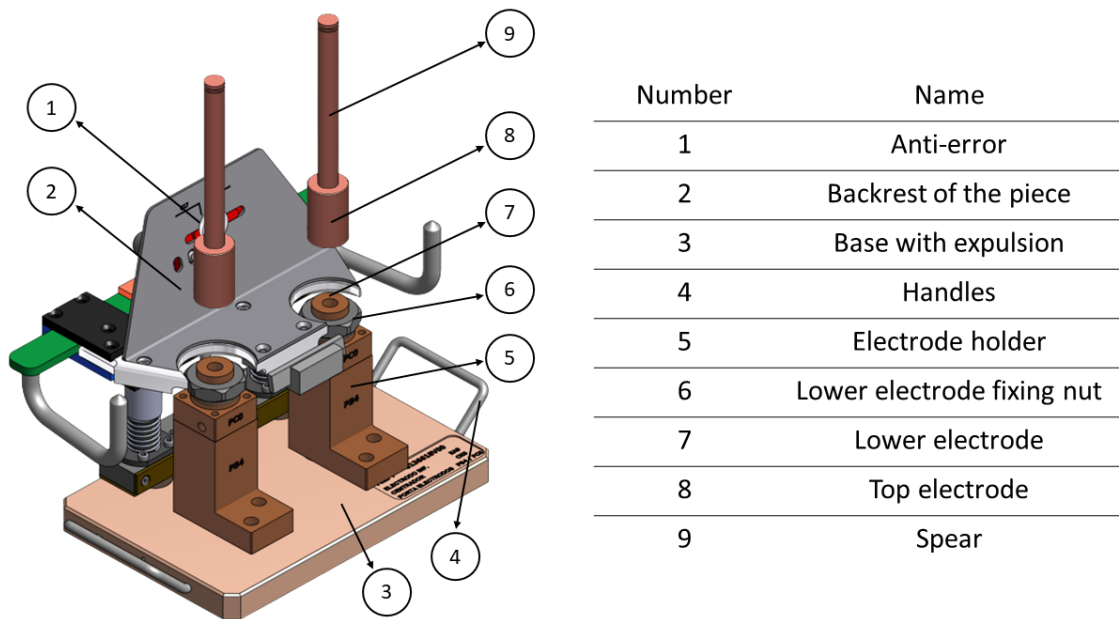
Detailed schematic view of the pedestal welding machine and its individual components.
